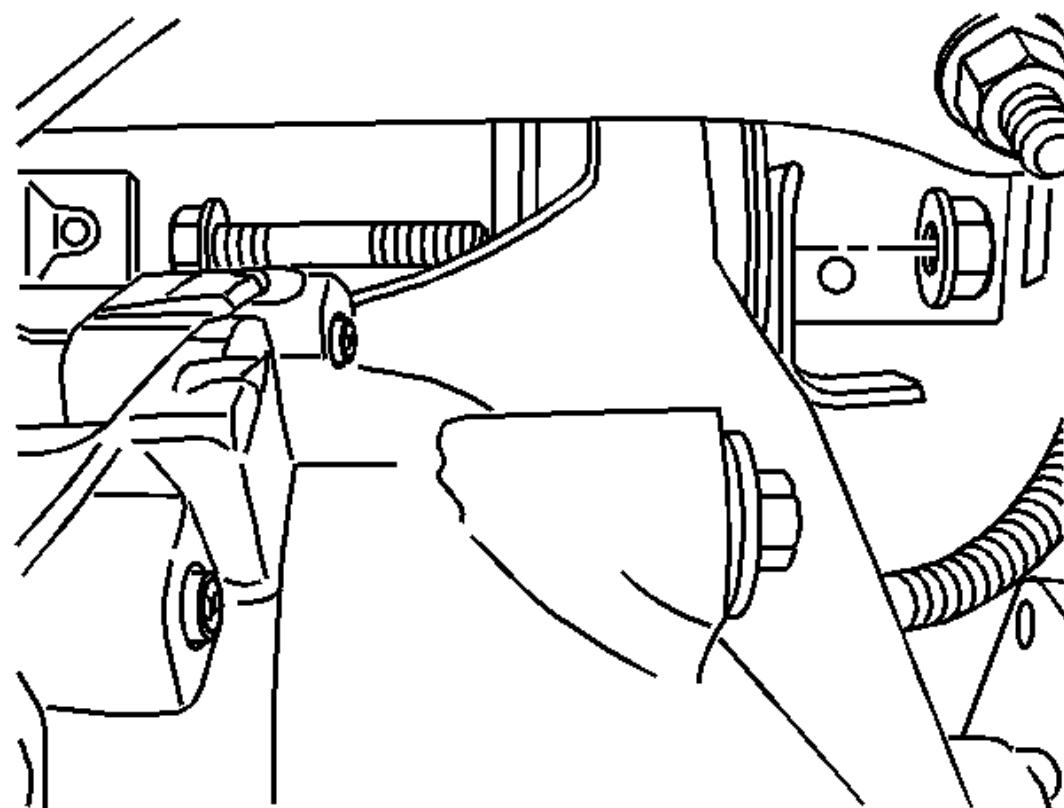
View Of Differential Carrier Upper Mounting Bolt
